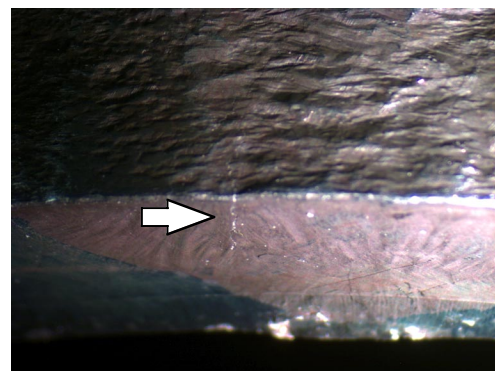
, Laser peening stop IGSCC in welds. Crack observed at the un-peened region.
